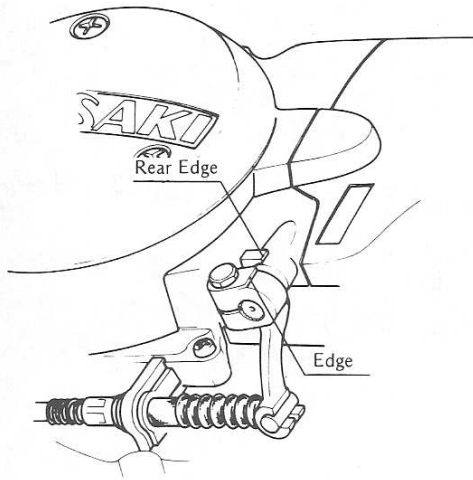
Clutch release lever alignment – KLT200 A (Sec 8)
